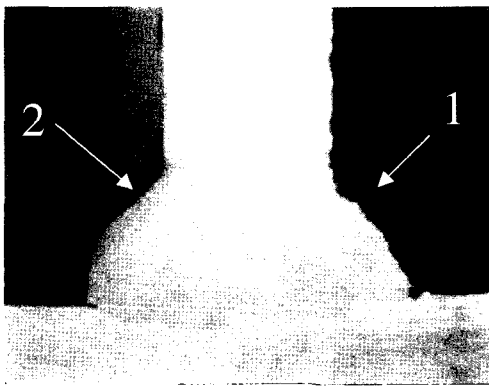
Horizontal fillet welding with 4mm gap by using 20Hz arc rotation (360A, 35V, 4mm/s)
